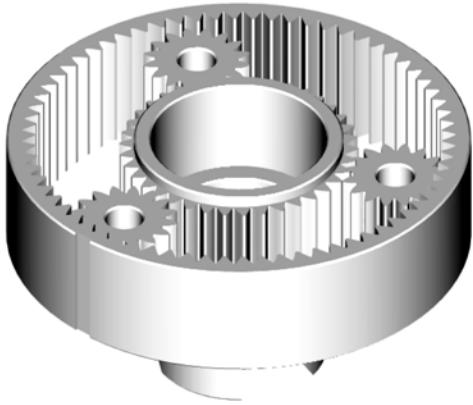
Solid model of 2K-H gear with asymmetric tooth profile and geometrically connected gear wheels
